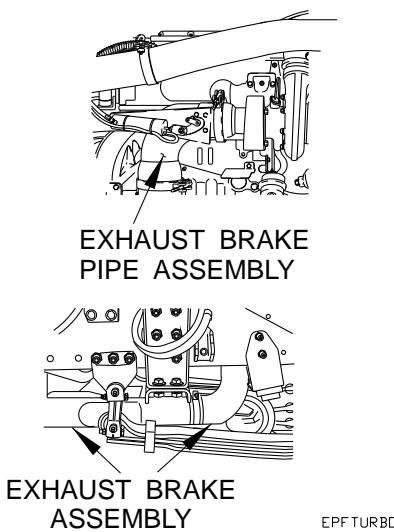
Exhaust Brake Pipe Assembly, Exhaust Pipe Assembly, or Muffler.
